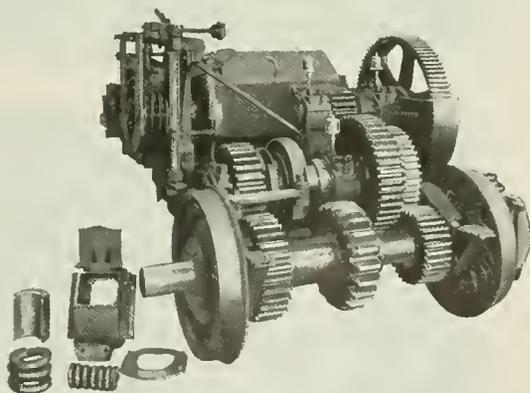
Front View of a Traction Motor Unit with a Journal Box Disassembled
